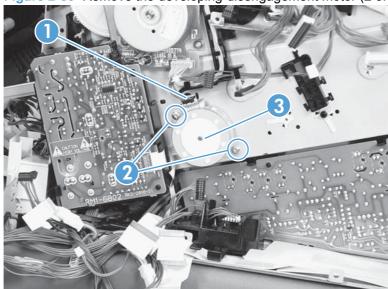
Remove the developing-disengagement motor (1 of 2)
